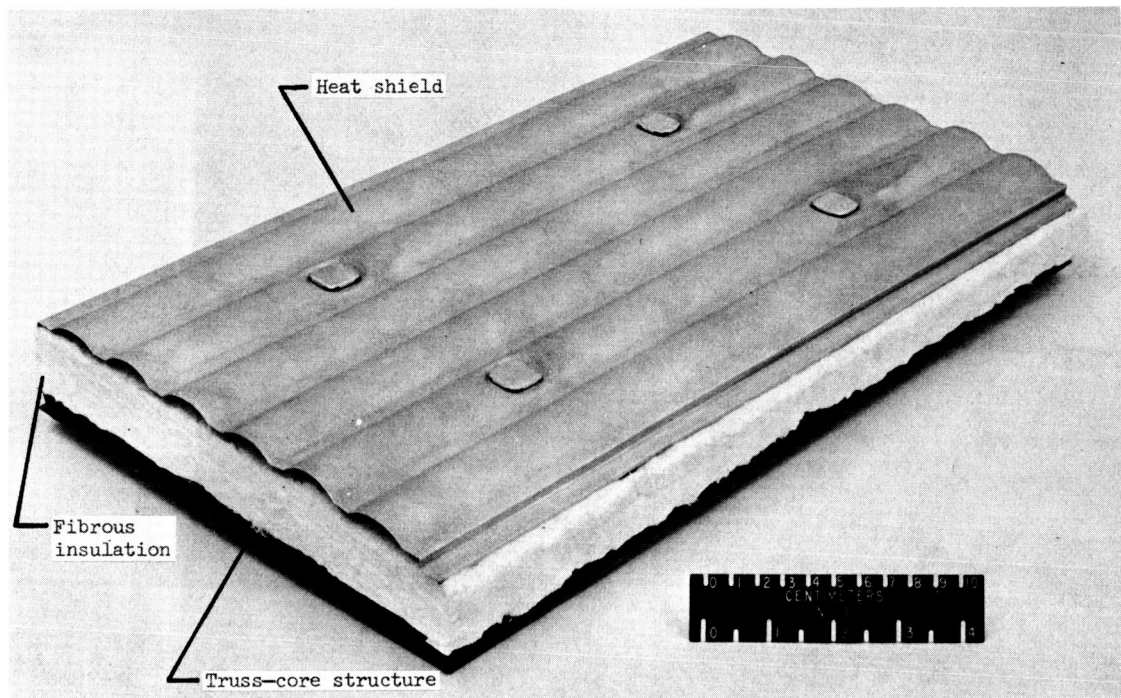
Typical flat heat-shield panel with spotwelded joints after assembly.
